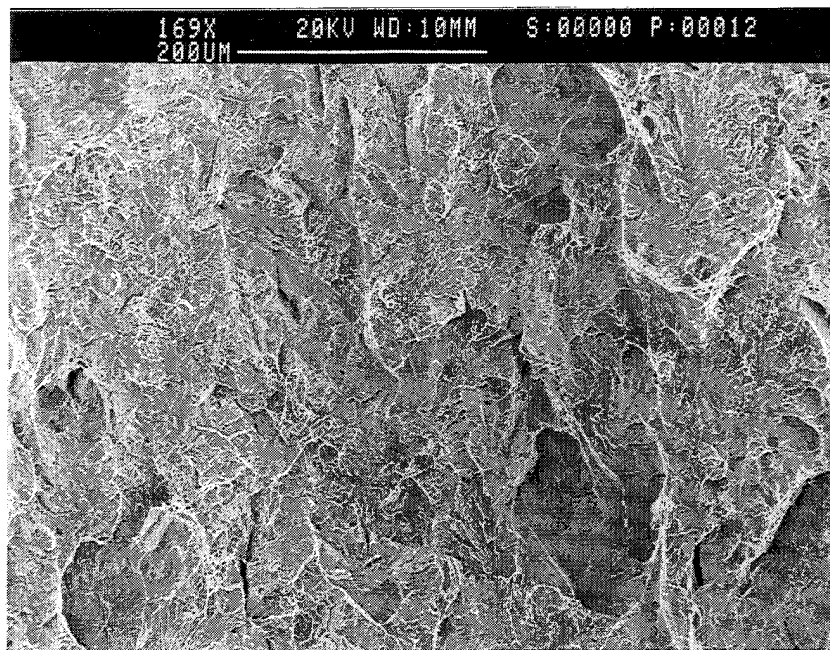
MV4 - GMA Weld Using C5 Cover Gas
